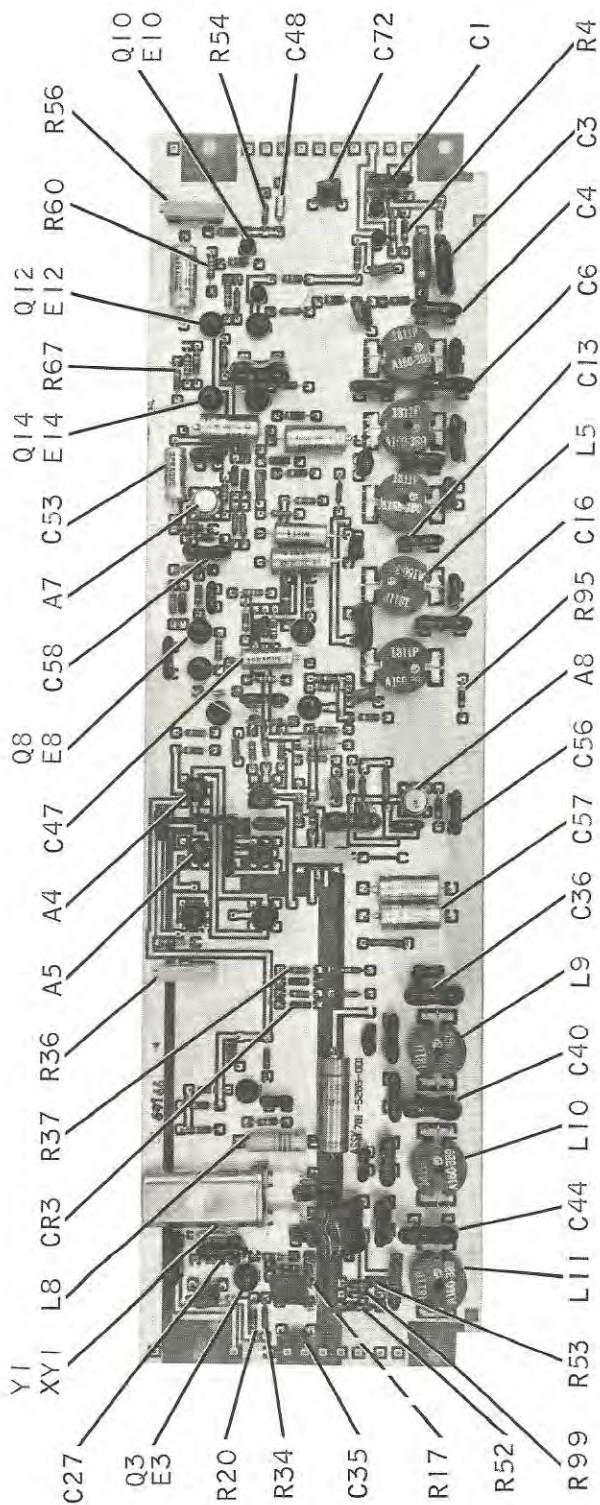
Printed Circuit Board (Sheet 3 of 5).
